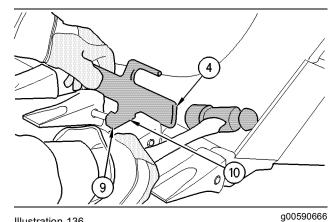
(4) Back of Pin-Master (9) Pin setter (10) Pin holder
